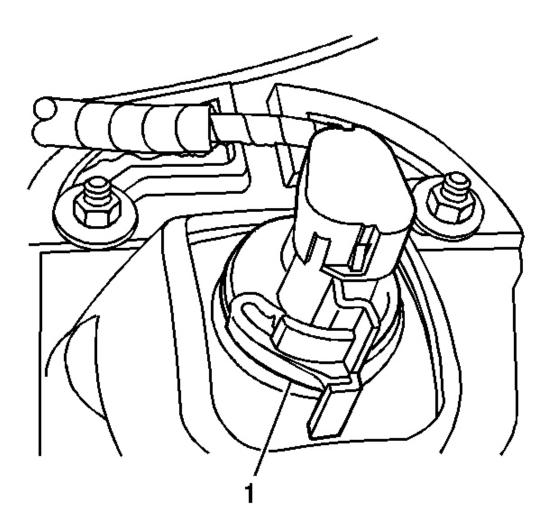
Locating Backup Lamp Socket Retaining Tab (GMC) Courtesy of GENERAL MOTORS CORP.
